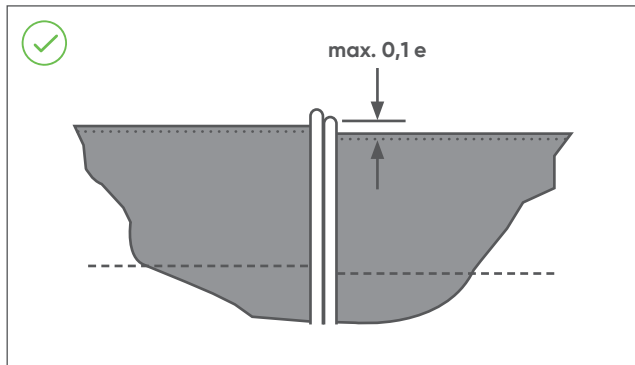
Butt-weld with mis-alignment of pipe (acceptable)
